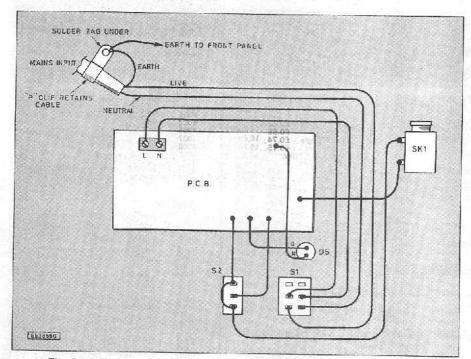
Interwiring, the front and rear aluminium panels must be earthed.
